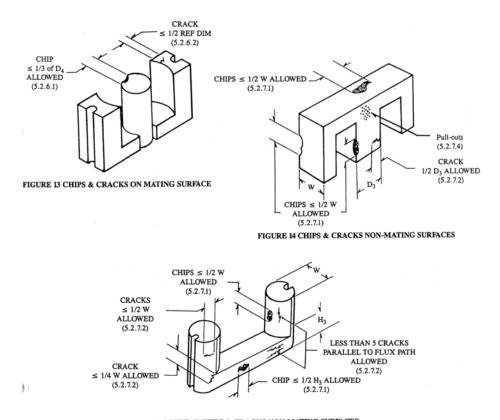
CHIPS & CRACKS NON-MATING SURFACES
